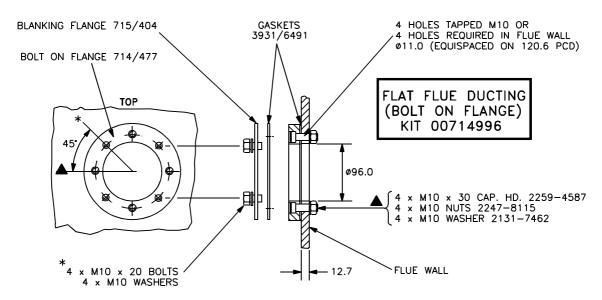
C Mounting Flange Orientation - Flat Flue Ducting (Bolt-on flange)
